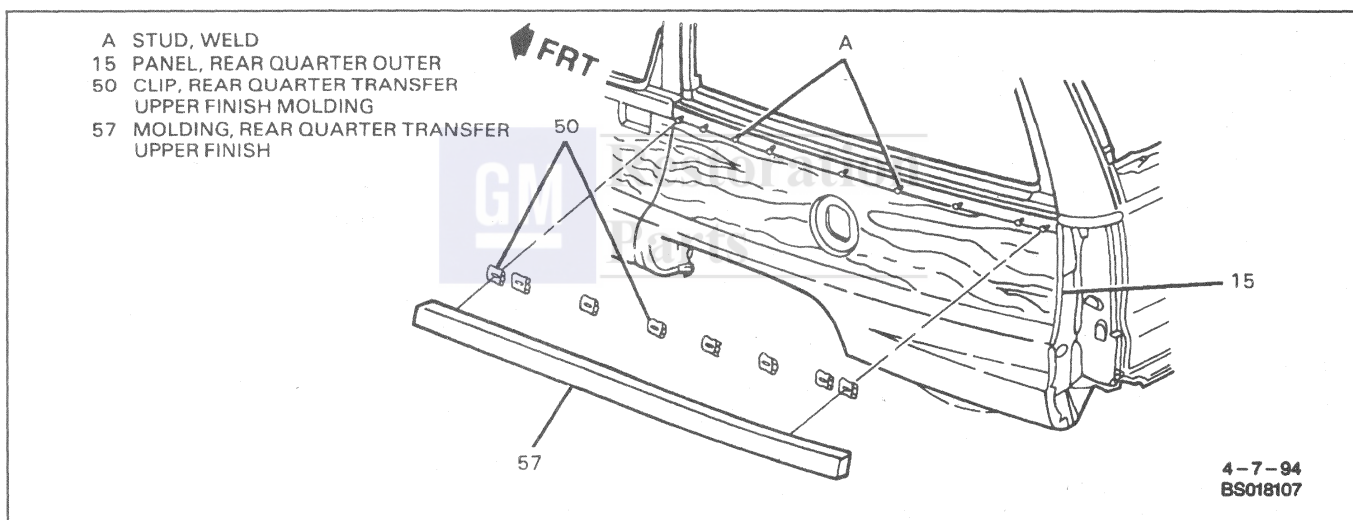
Rear Quarter Transfer Upper Finish Molding - (Wagon)
